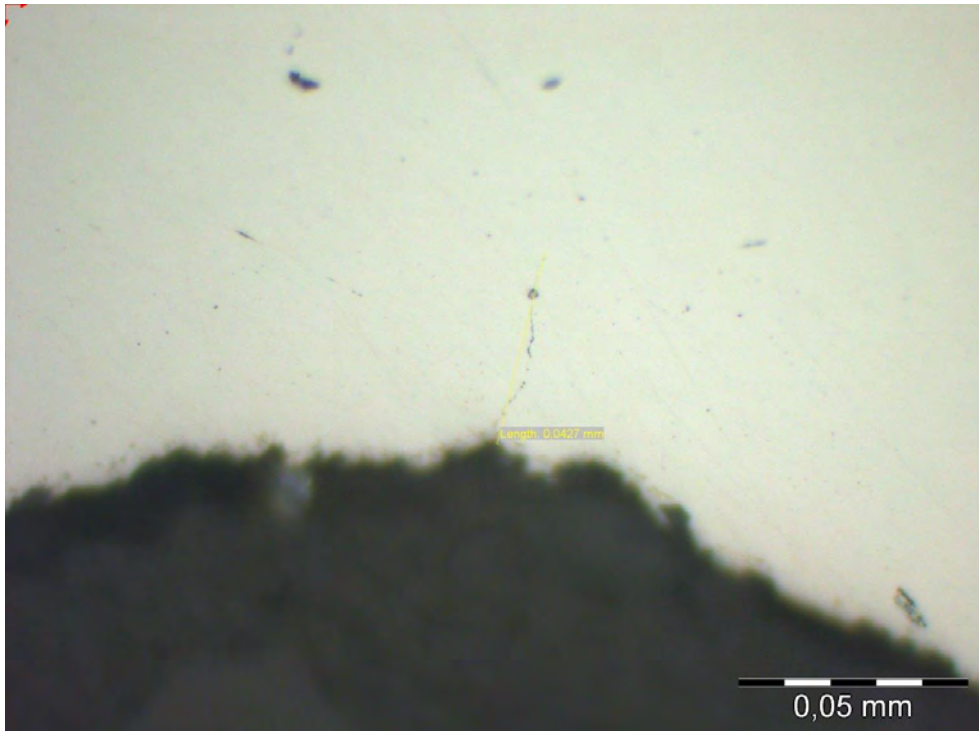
Crack at segment C, second ridge on barrel no. 1613
